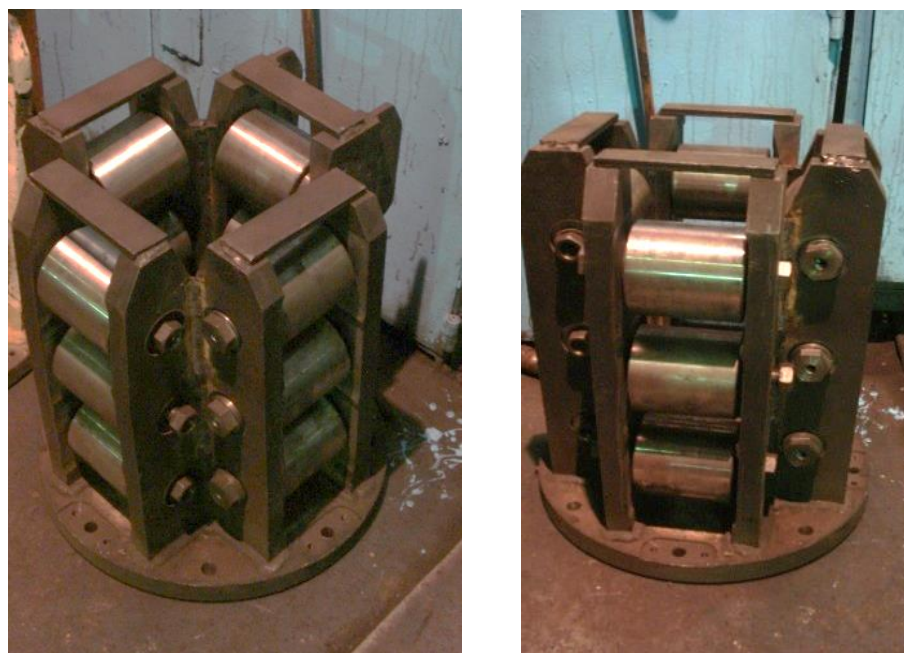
Three section hanger roller unit of billet caster secondary cooling zone
